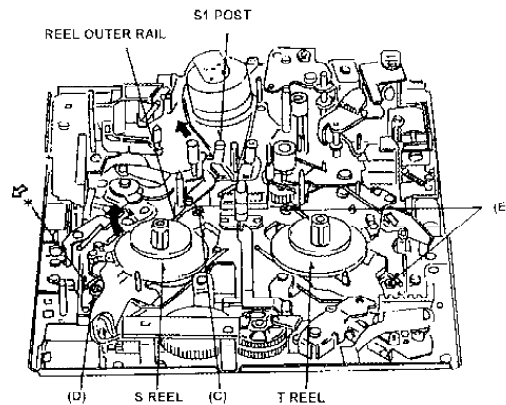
Removal of S & T Reel Rotor Unit
